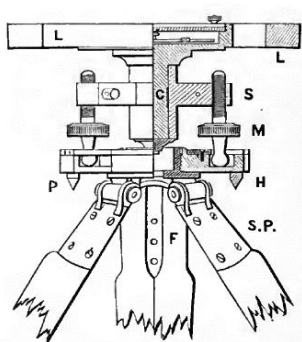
Details of Stanley's dumpy level: half elevation to left, half section to right.
